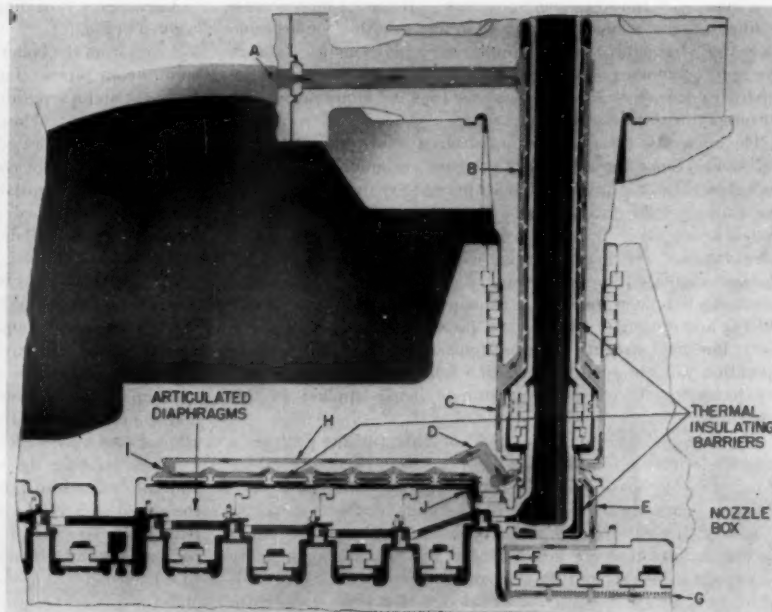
ENLARGED CROSS SECTION SHOWING PATH OF COOLING STEAM WITHOUT ROTOR COOLING
